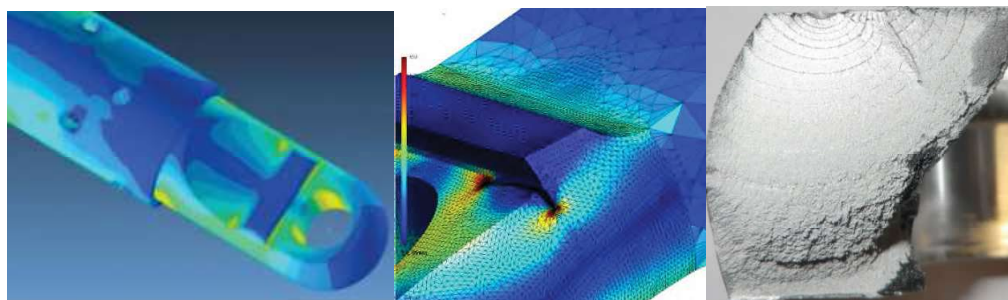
Landing gear part: cracked surface of tested coupon and XFEM modelling
